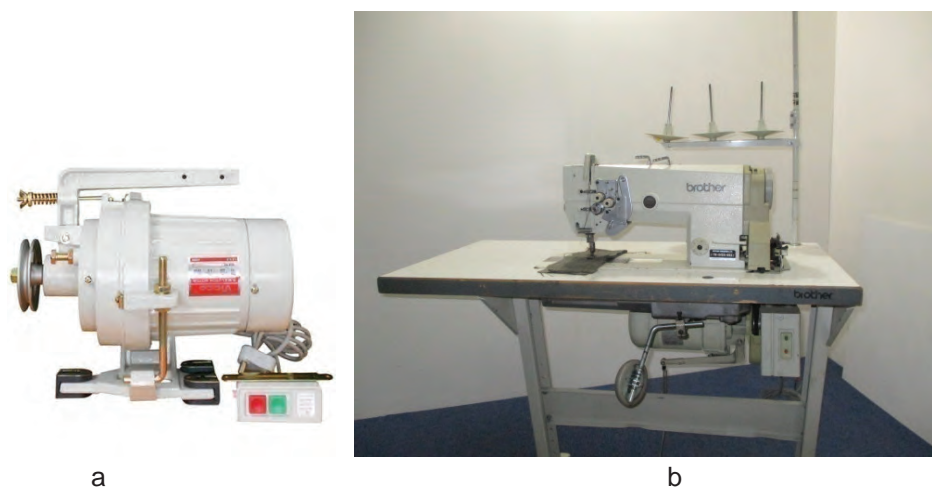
Clutch motor (a) and clutch motor fixed on a sewing machine (b)
